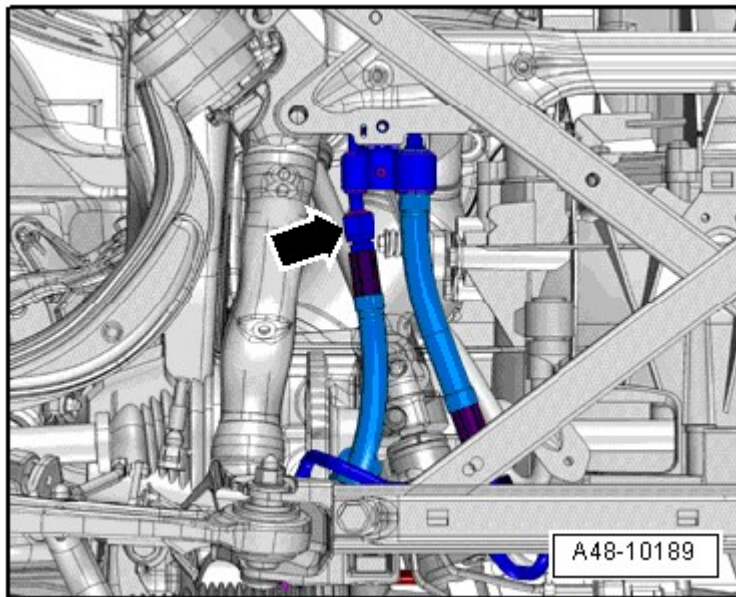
Identifying Power Steering Hydraulic Pipe -Arrow-
